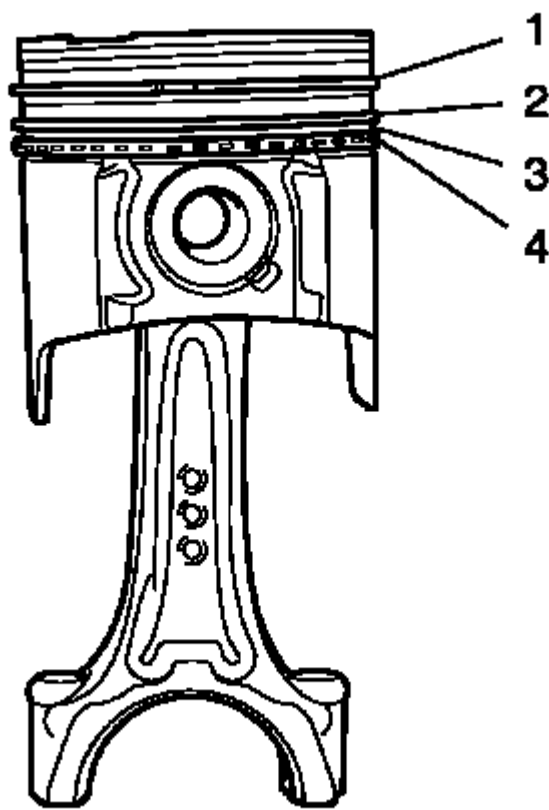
Upper Compression Ring, Lower Compression Ring, Oil Rings And Oil Ring Spacer
